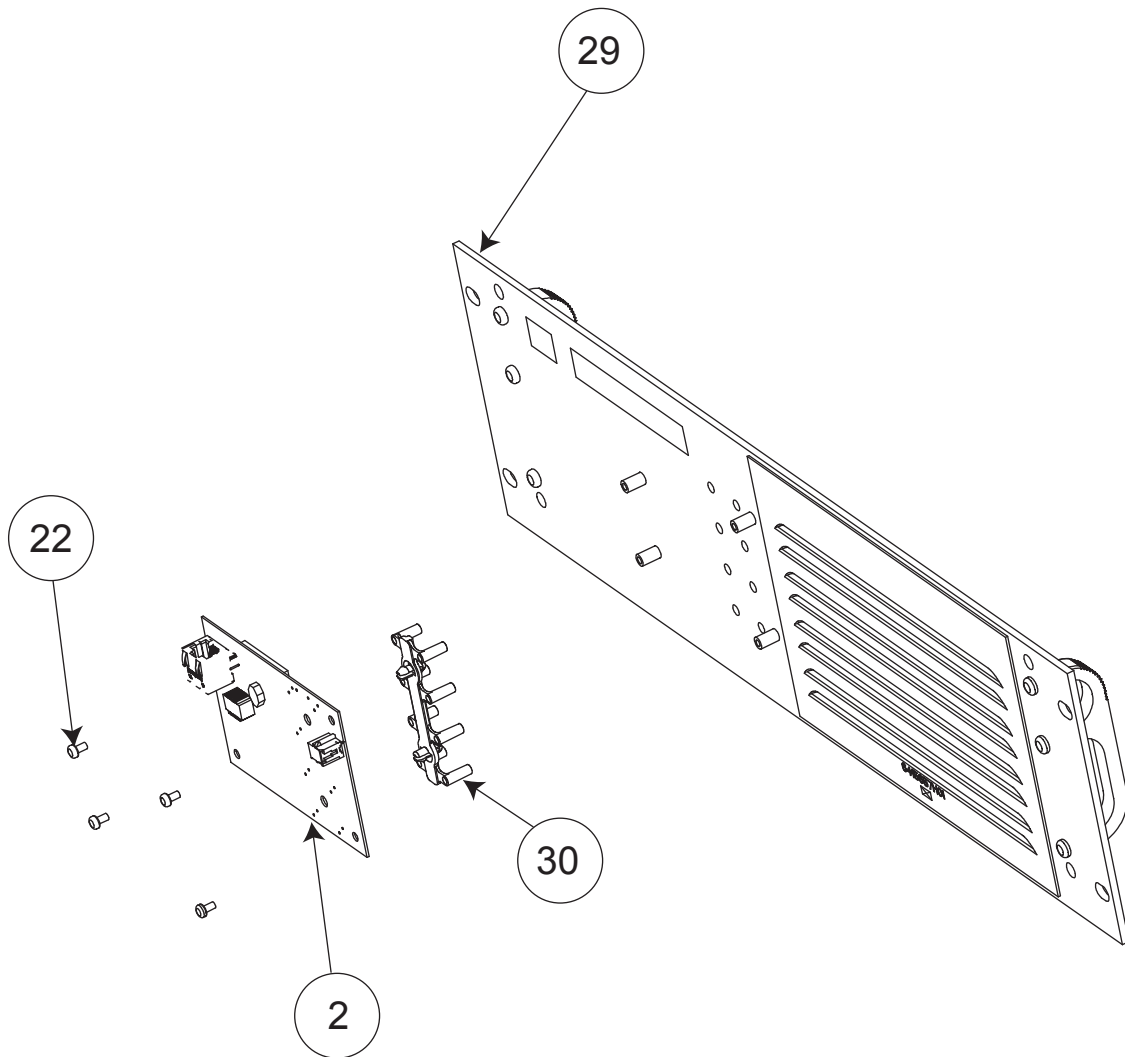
Receive Bracket and Radio Assembly Exploded View
